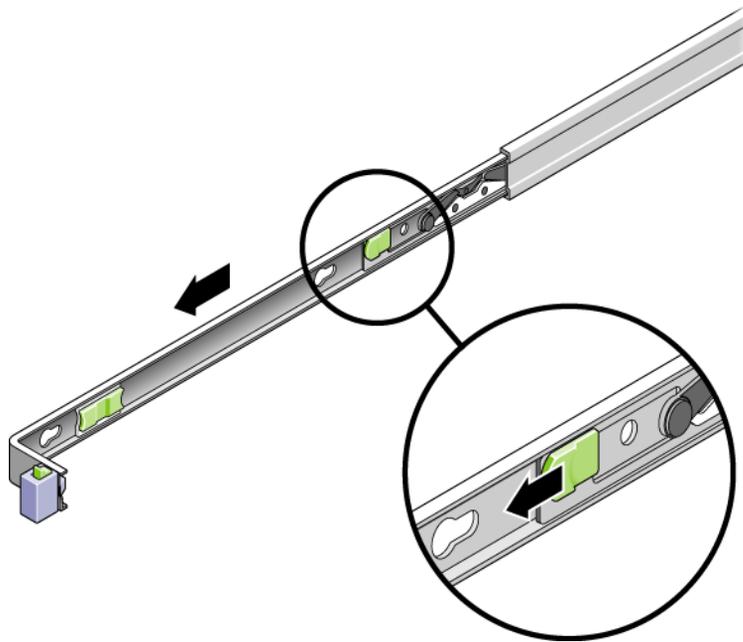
Sliding the Mounting Bracket Release Button
